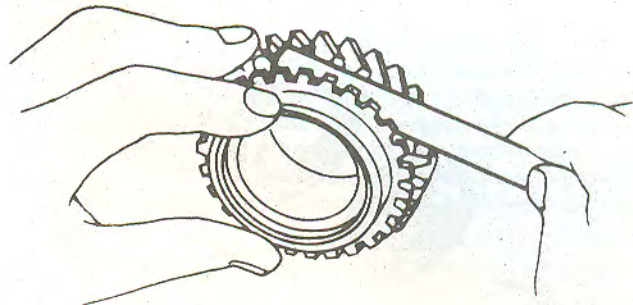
Checking the gap between the face of the synchroniser ring and the gearwheel by means of a feeler gauge.
